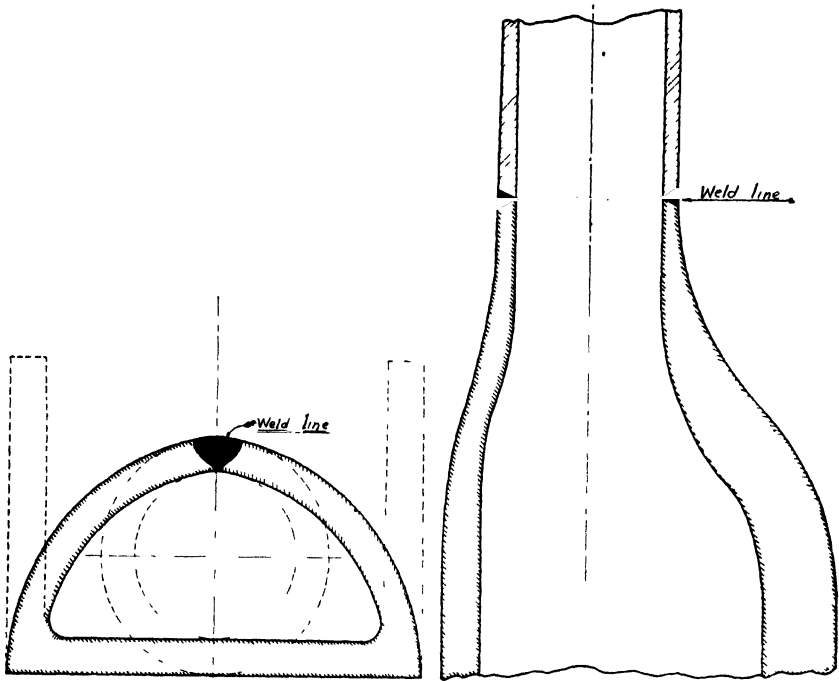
, (left). Cross section of water wall element. Fig. 12, (right). Enlarged section of water wall element showing welded end connections.
